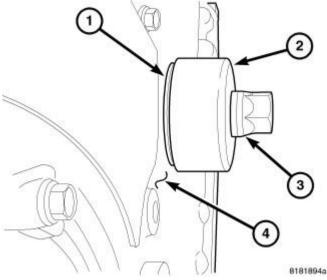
Flex Plate, Counter Weight, Tone Wheel & Bolts Courtesy of CHRYSLER GROUP, LLC
